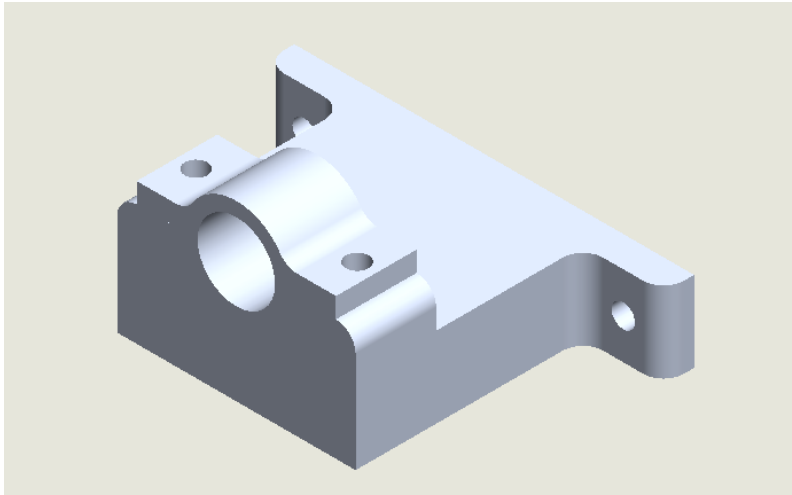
SolidWorks CAD assemble drawing of the actuator housing support motor and the holder.
